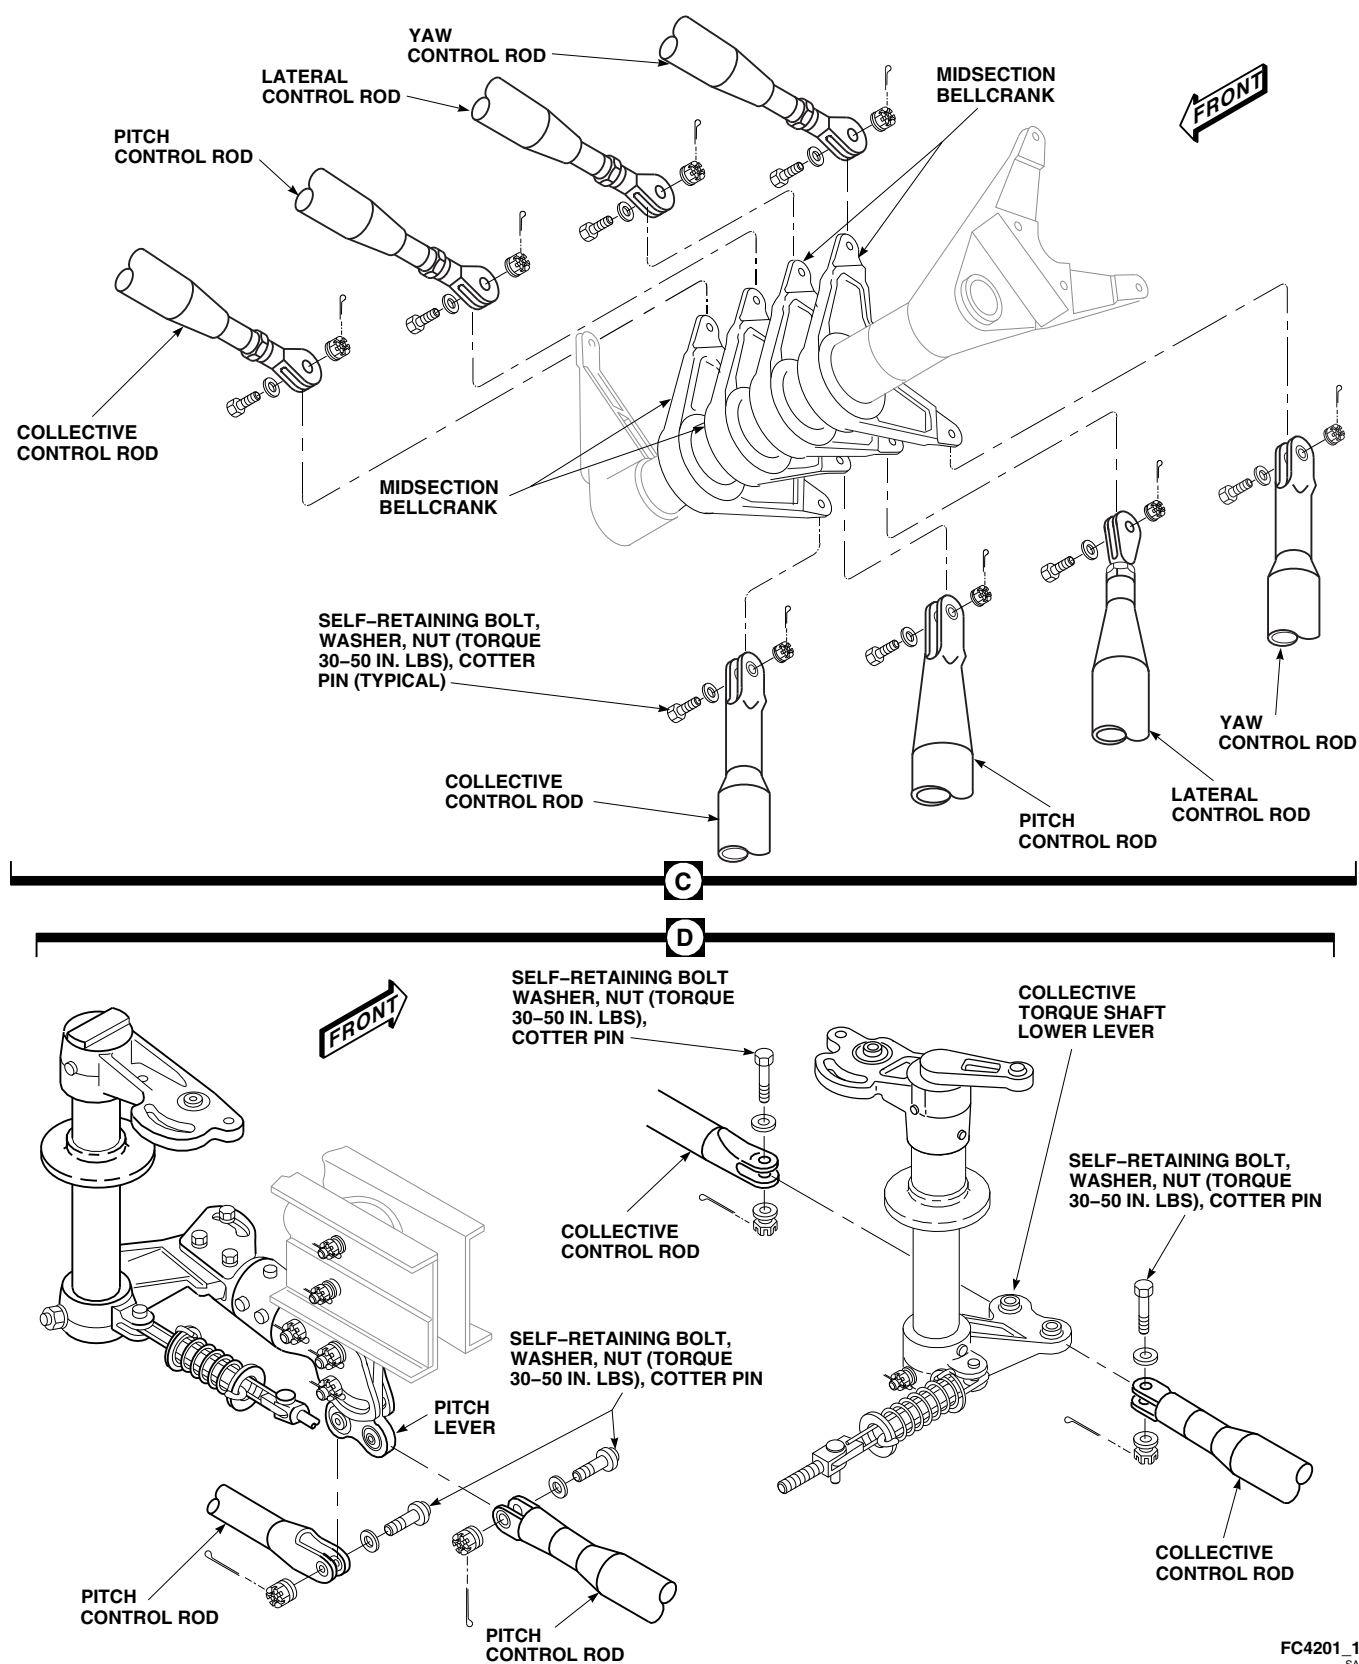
REPLACE CABIN CONTROL RODS (SHEET 2 OF 4)
